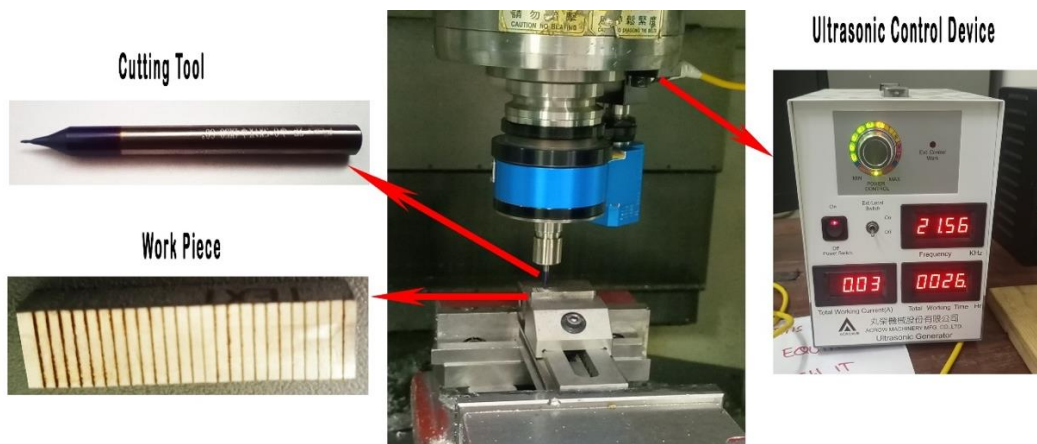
Cutting Tool and Workpiece Along with the Ultrasonic Setup
